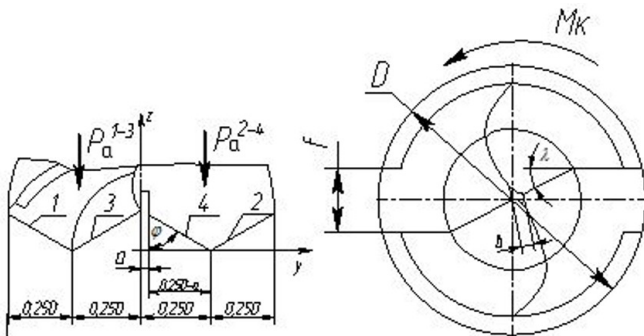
Drilling holes with a double-edge twist drill without a cross edge.
